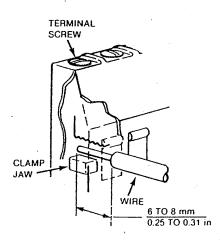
Connecting Wire to Compression Type Terminal Having a Clamp Jaw
